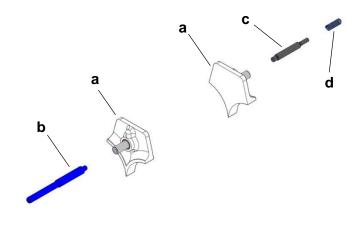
Plastic guide WW 85mm and 170mm: Assembling parts
